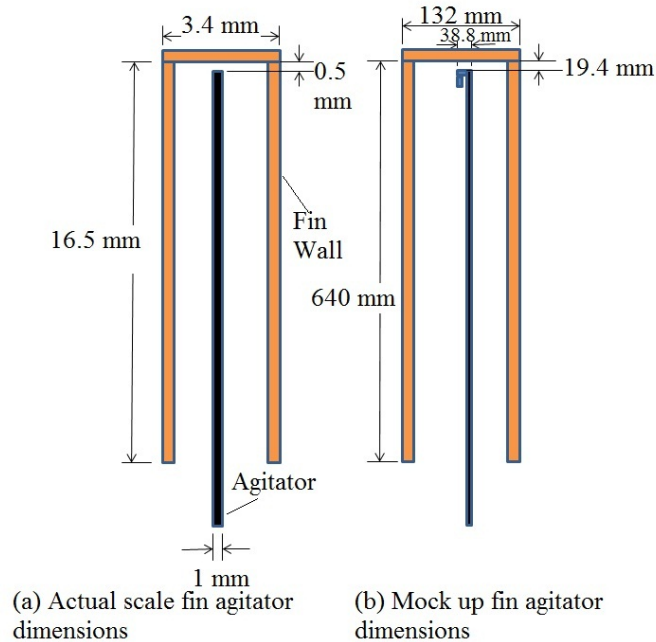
Dimensions of the actual scale unit and the mock up unit representing one channel of Fig. 2.1
